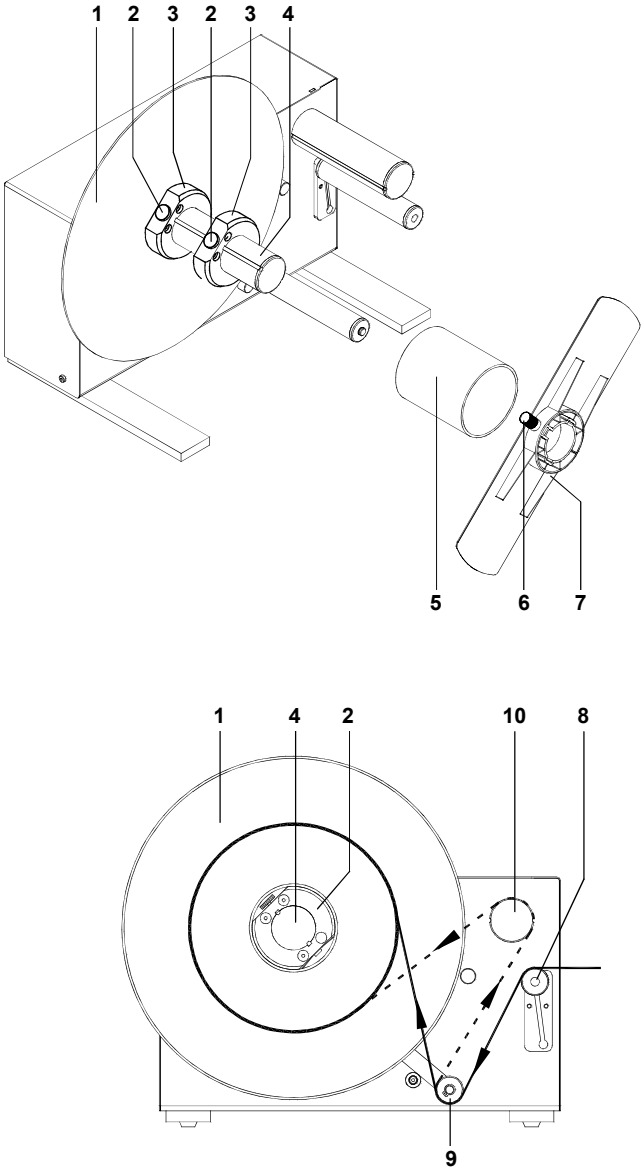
Rewinding onto 3 in. (76 mm) Cardboard Core (drawing below without flange)
